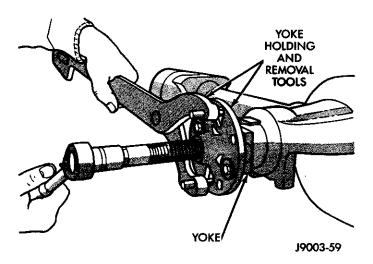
Drive Pinion Gear Shaft (Axle) Yoke Removal
